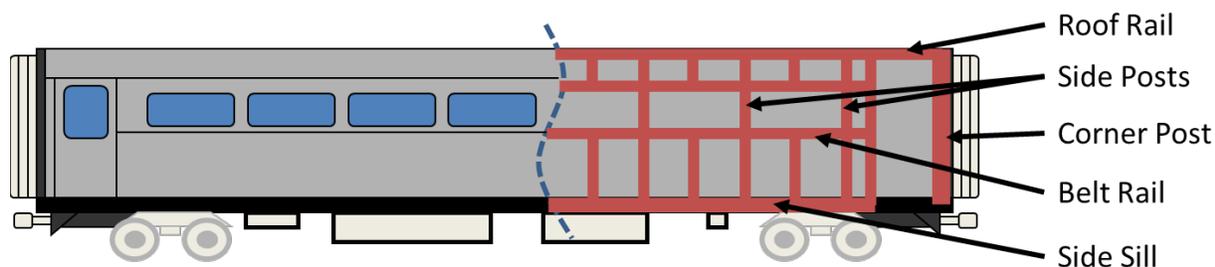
Schematic of Structural Members in Sidewall of Single-level Passenger Car
